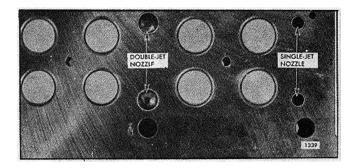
Water Nozzles in Four-Valve Cylinder Head
